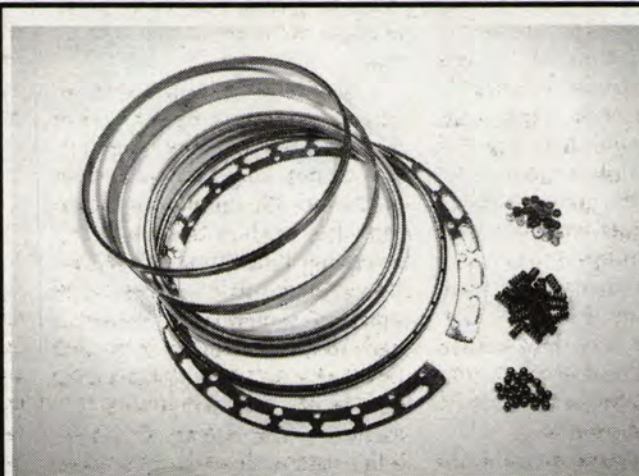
The spring-loaded ball bearing tone chambers were a nightmare to assembly with almost 150 metal parts in the pot assembly!
